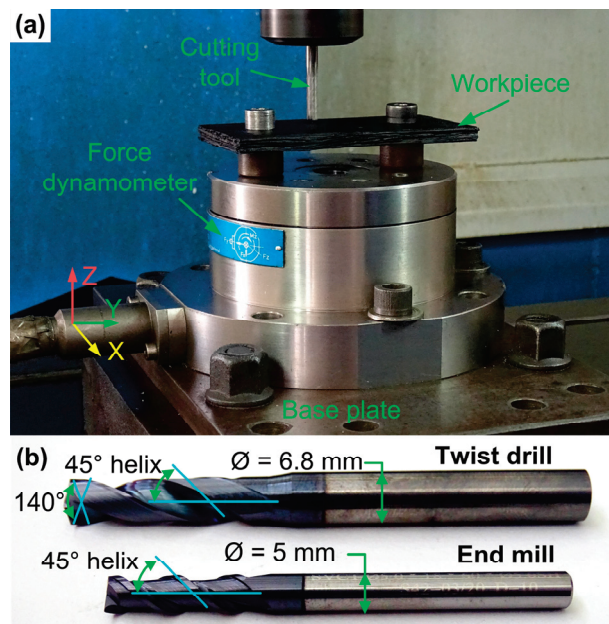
(a) Machining setup; (b) cutting tools for experimentation.
